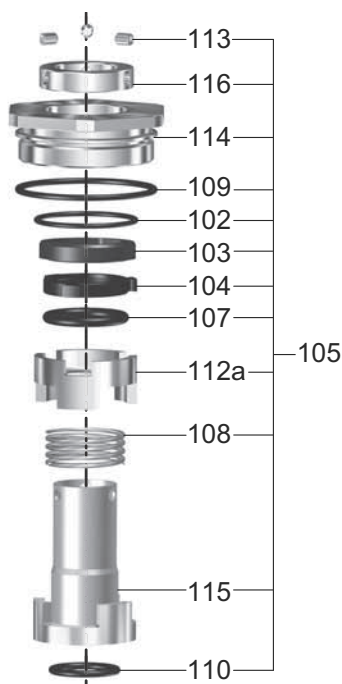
Shaft-seal parts for $\varnothing 28$ and $\varnothing 36$ shaft seals
